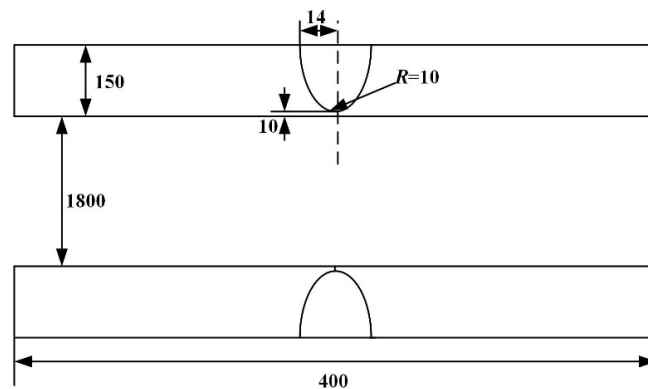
Geometry of the 2.25Cr-1Mo-0.25V steel cylinder with a single-U butt weld (unit: mm).
